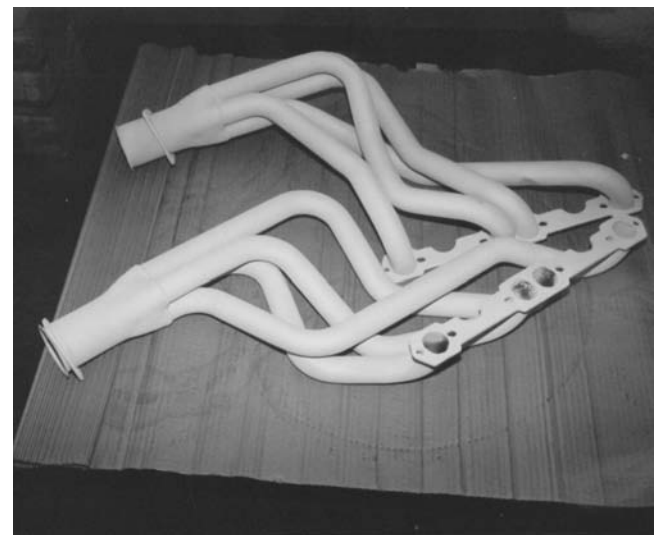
Exhaust headers metallized with aluminum using the wire combustion process. The aluminum provides protection from heat and corrosion. Courtesy of ASB Industries Inc.
